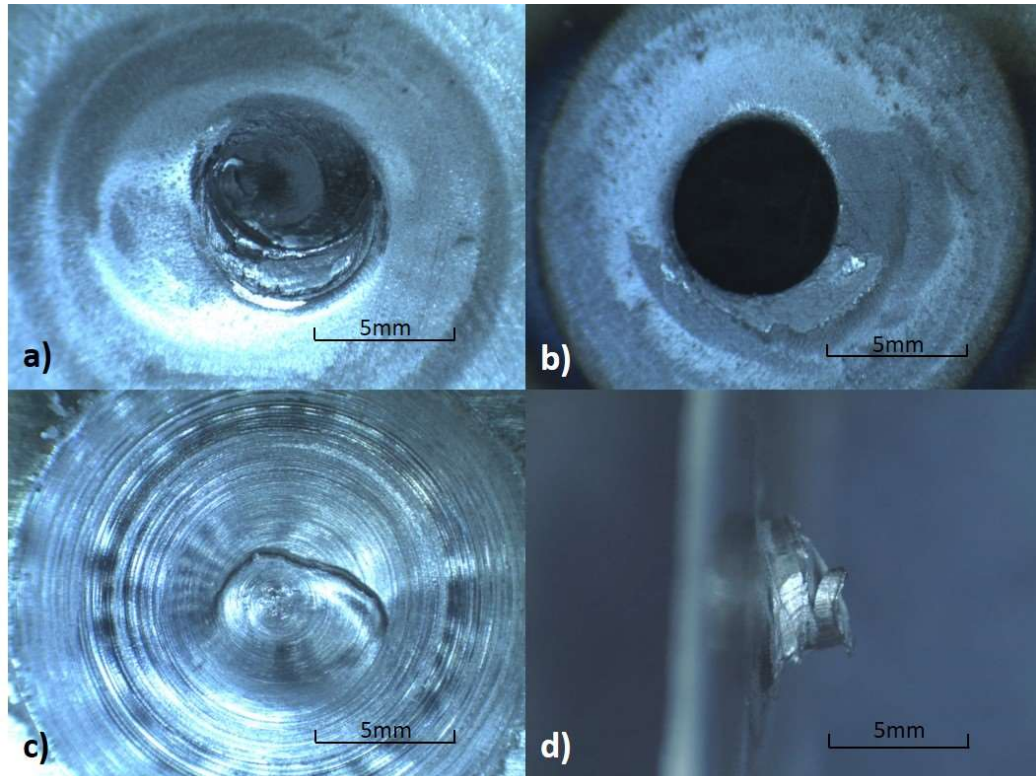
Failure of Two-Sided FSR by Extrusion joints with partial nugget pullout. a) Bottom sheet of aluminum with rivet sheared off. b) Empty hole left in the steel sheet. c) Outer surface of the top sheet showing fracture due to top sheet thinning. d) Extrusion rivet left attached to top sheet.
